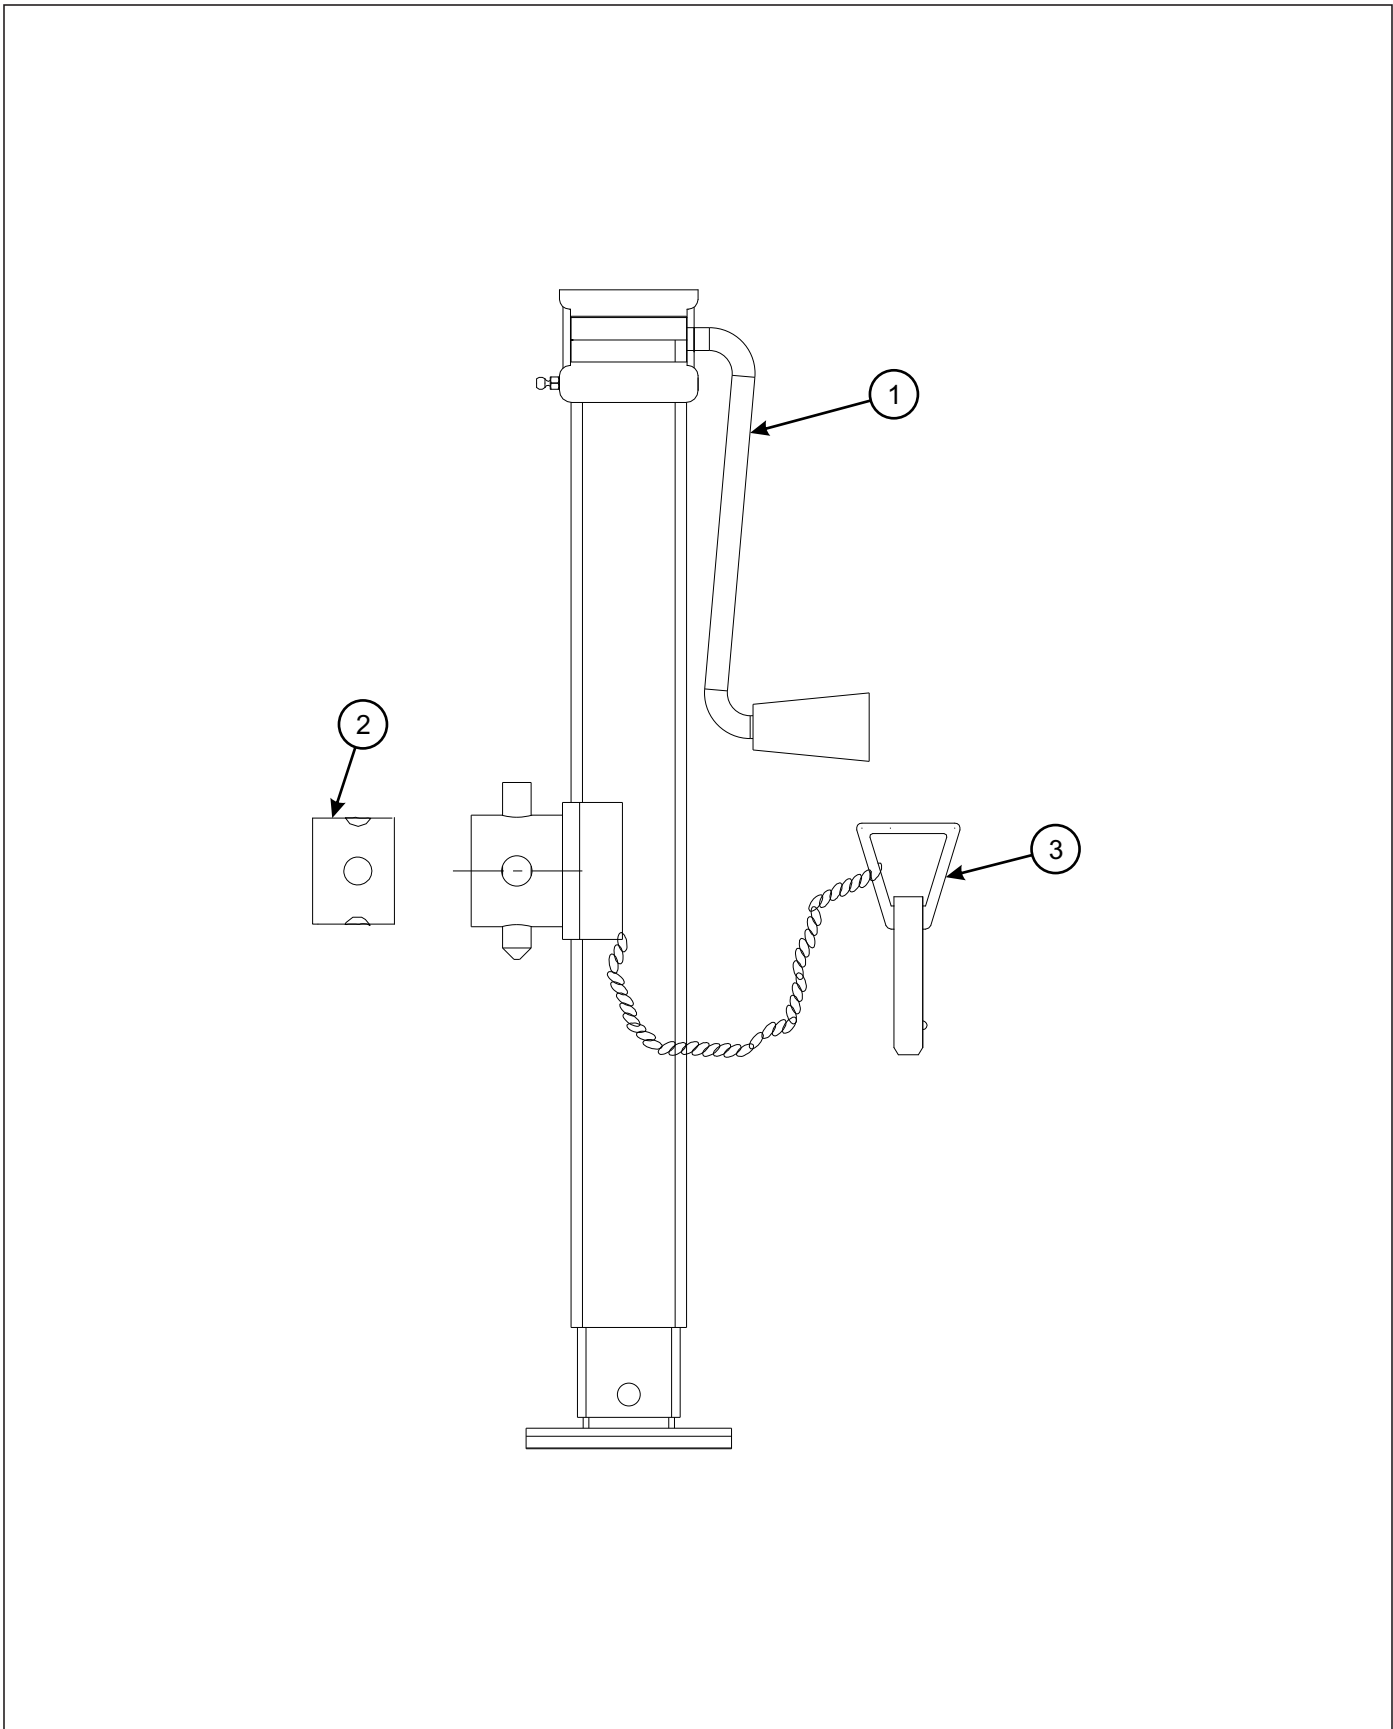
7,000 Lb. Sidewind Jack Assembly
